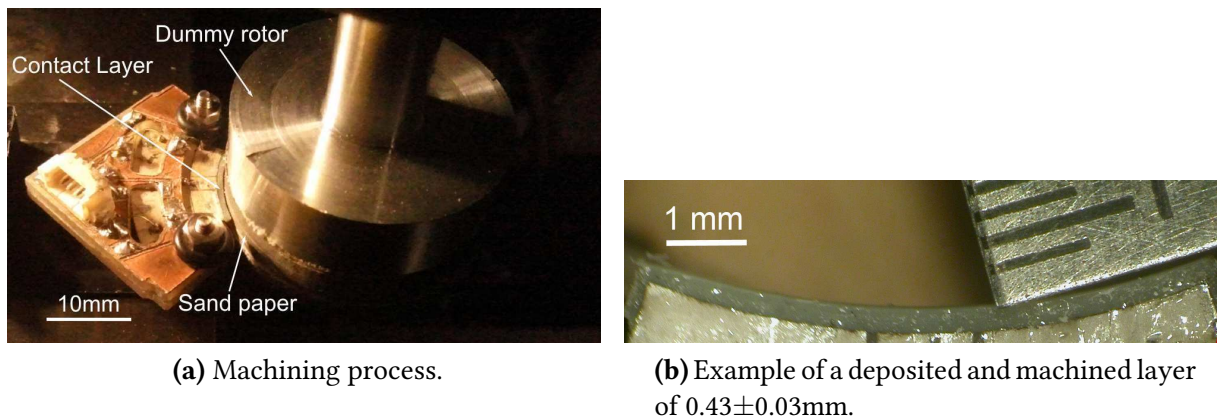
Contact layer deposition process. A thick raw layer is molded onto the actuator. Excess of material on the actuator faces is removed using a sharp blade. The layer is then machined to the necessary thickness using sandpaper placed on a dummy rotor.
